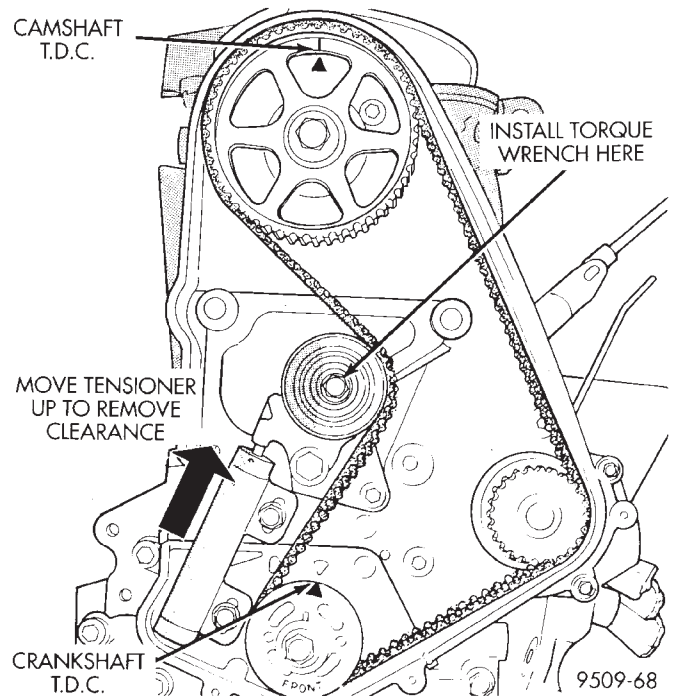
Adjusting Crankshaft Sprocket for Timing Belt Installation
